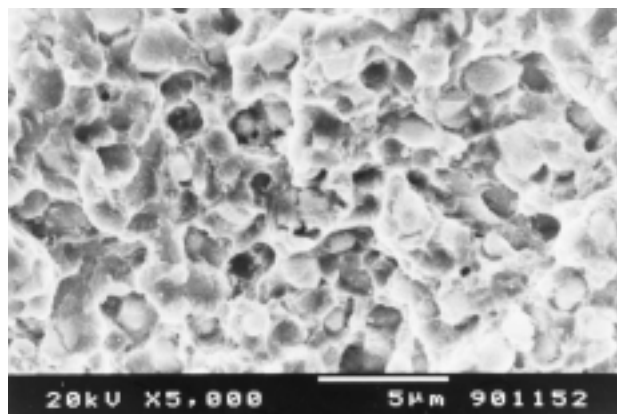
Fracture surface of nitrided tool (500 °C, 60 min) - core matrix
